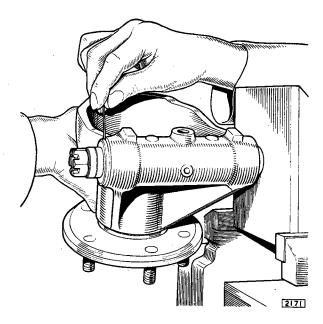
Measuring the amount of clearance between the hub carrier and large washer to determine the endfloat of the bearings
